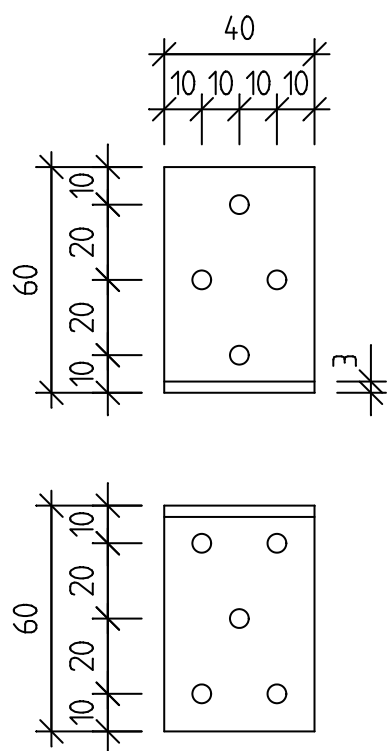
Dimensions of Angle Bracket type 6/60x60x3,0x40
